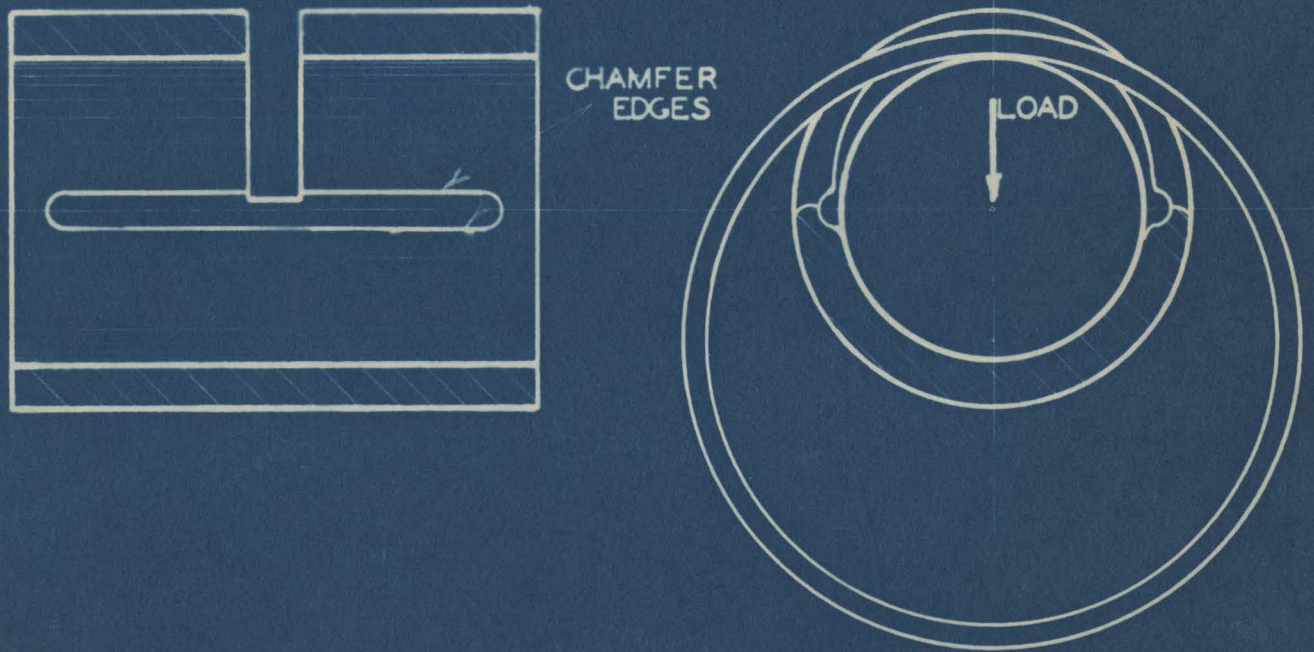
Correct Grooving of an Oil Ring Journal Bearing.
